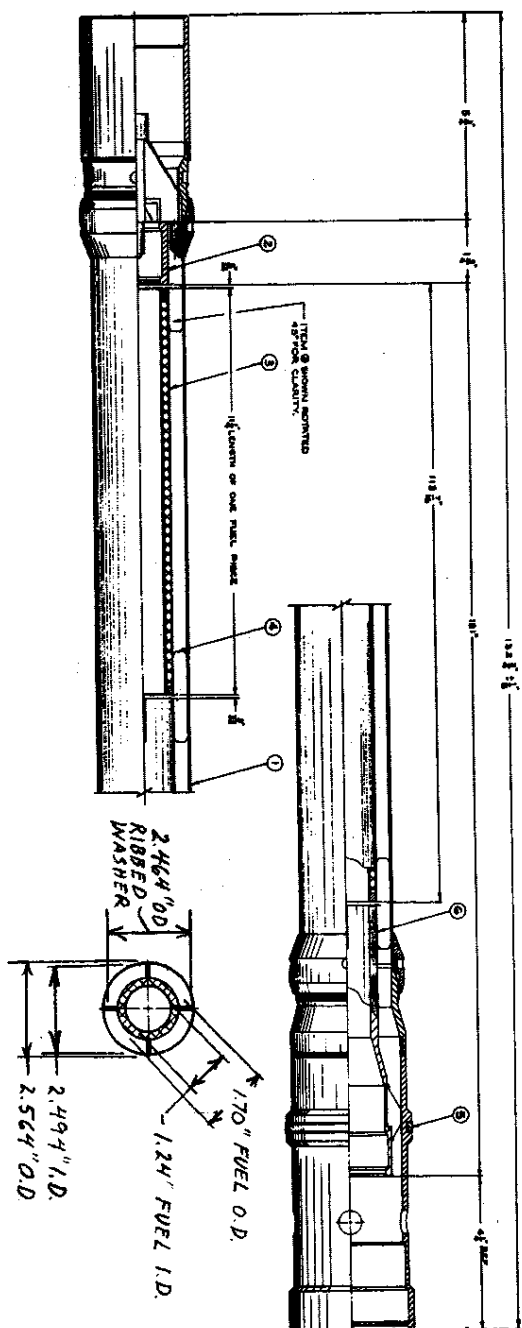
SEGMENTED METAL TUBE (SMT) ASSEMBLY
